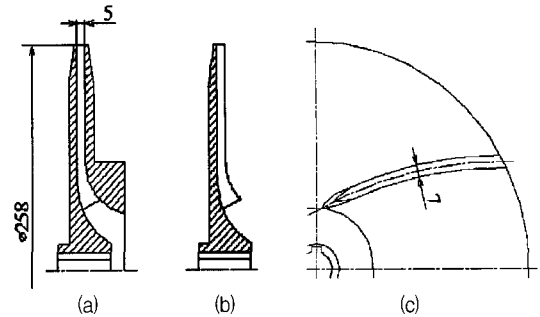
Test impellers: (a) closed impeller I, (b) semi-open impeller II and (c) front view of the test impellers
